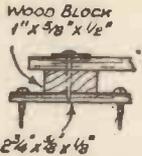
The Block for Clamping the Pantagraph to the Drawing Board.
